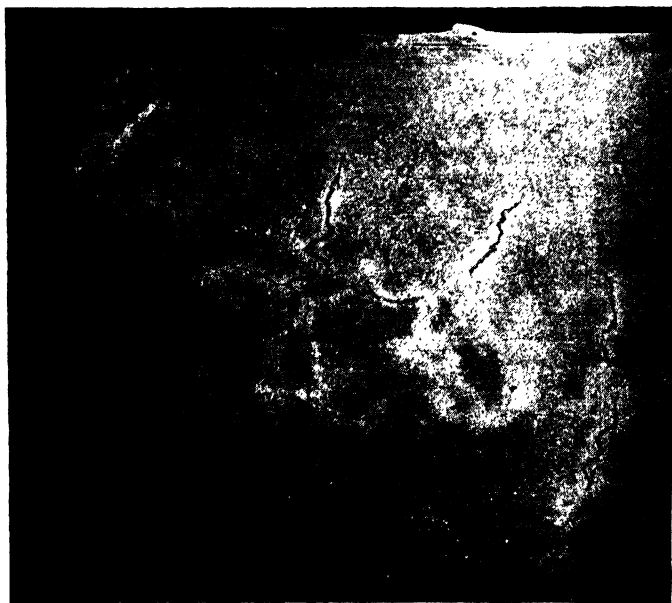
Internal hot tears brought to the surface by machining a steel casting. (*Courtesy of Pittsburgh Station, Bureau of Mines.*)
